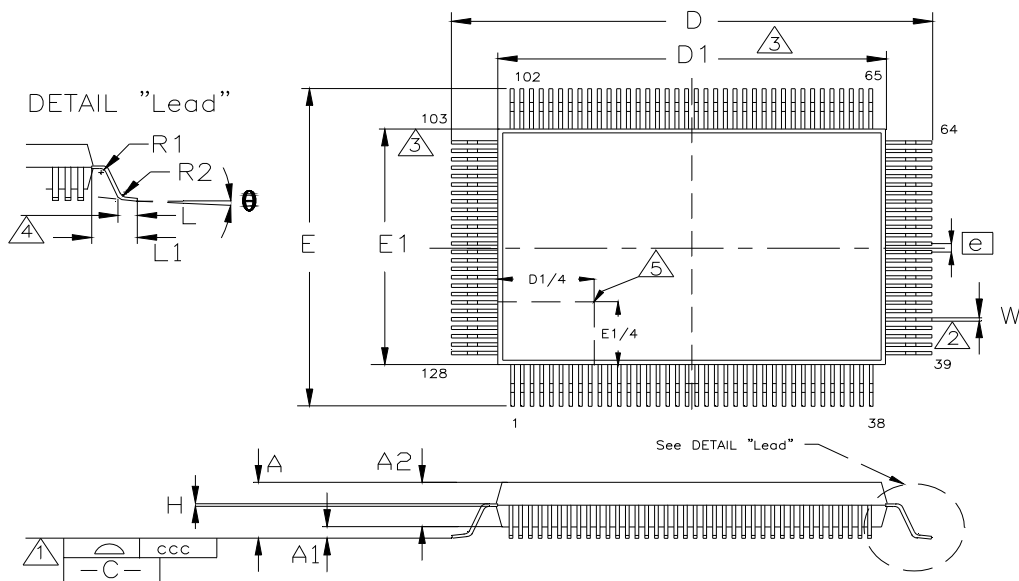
128 Pin QFP Package Outline, 14X20X2.7 Body, 3.2 mm Footprint
